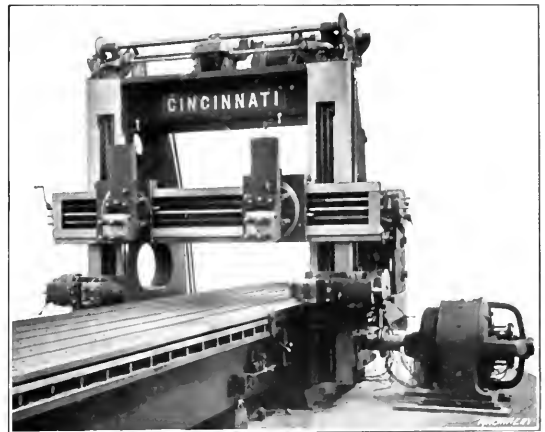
Arrangement of the Reversible Electric Motor Drive
